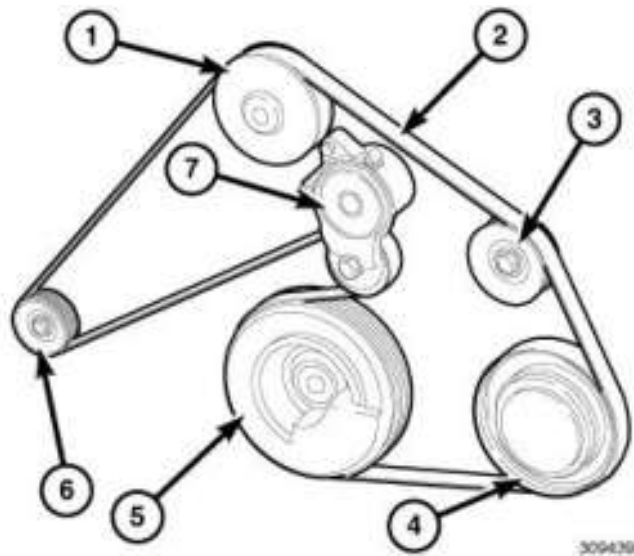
Pulleys, Tensioner & Drive Belt Routing 3.0L
